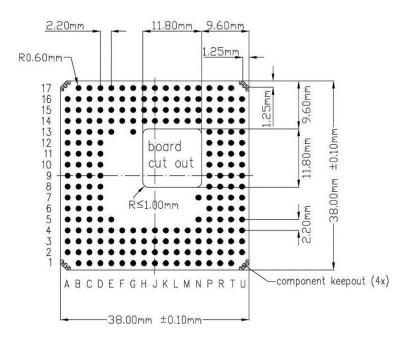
Recommended PCB land pattern for TQMa335xL, top view through TQMa335xL
